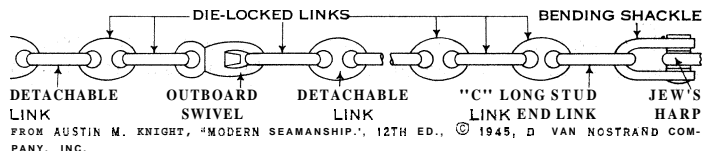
OUTBOARD SWIVEL SHOT, DIE-LOCKED ANCHOR CHAIN
